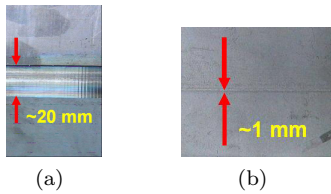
The profile of welded part of flash butt welding(a) and laser welding after pickling(b)
